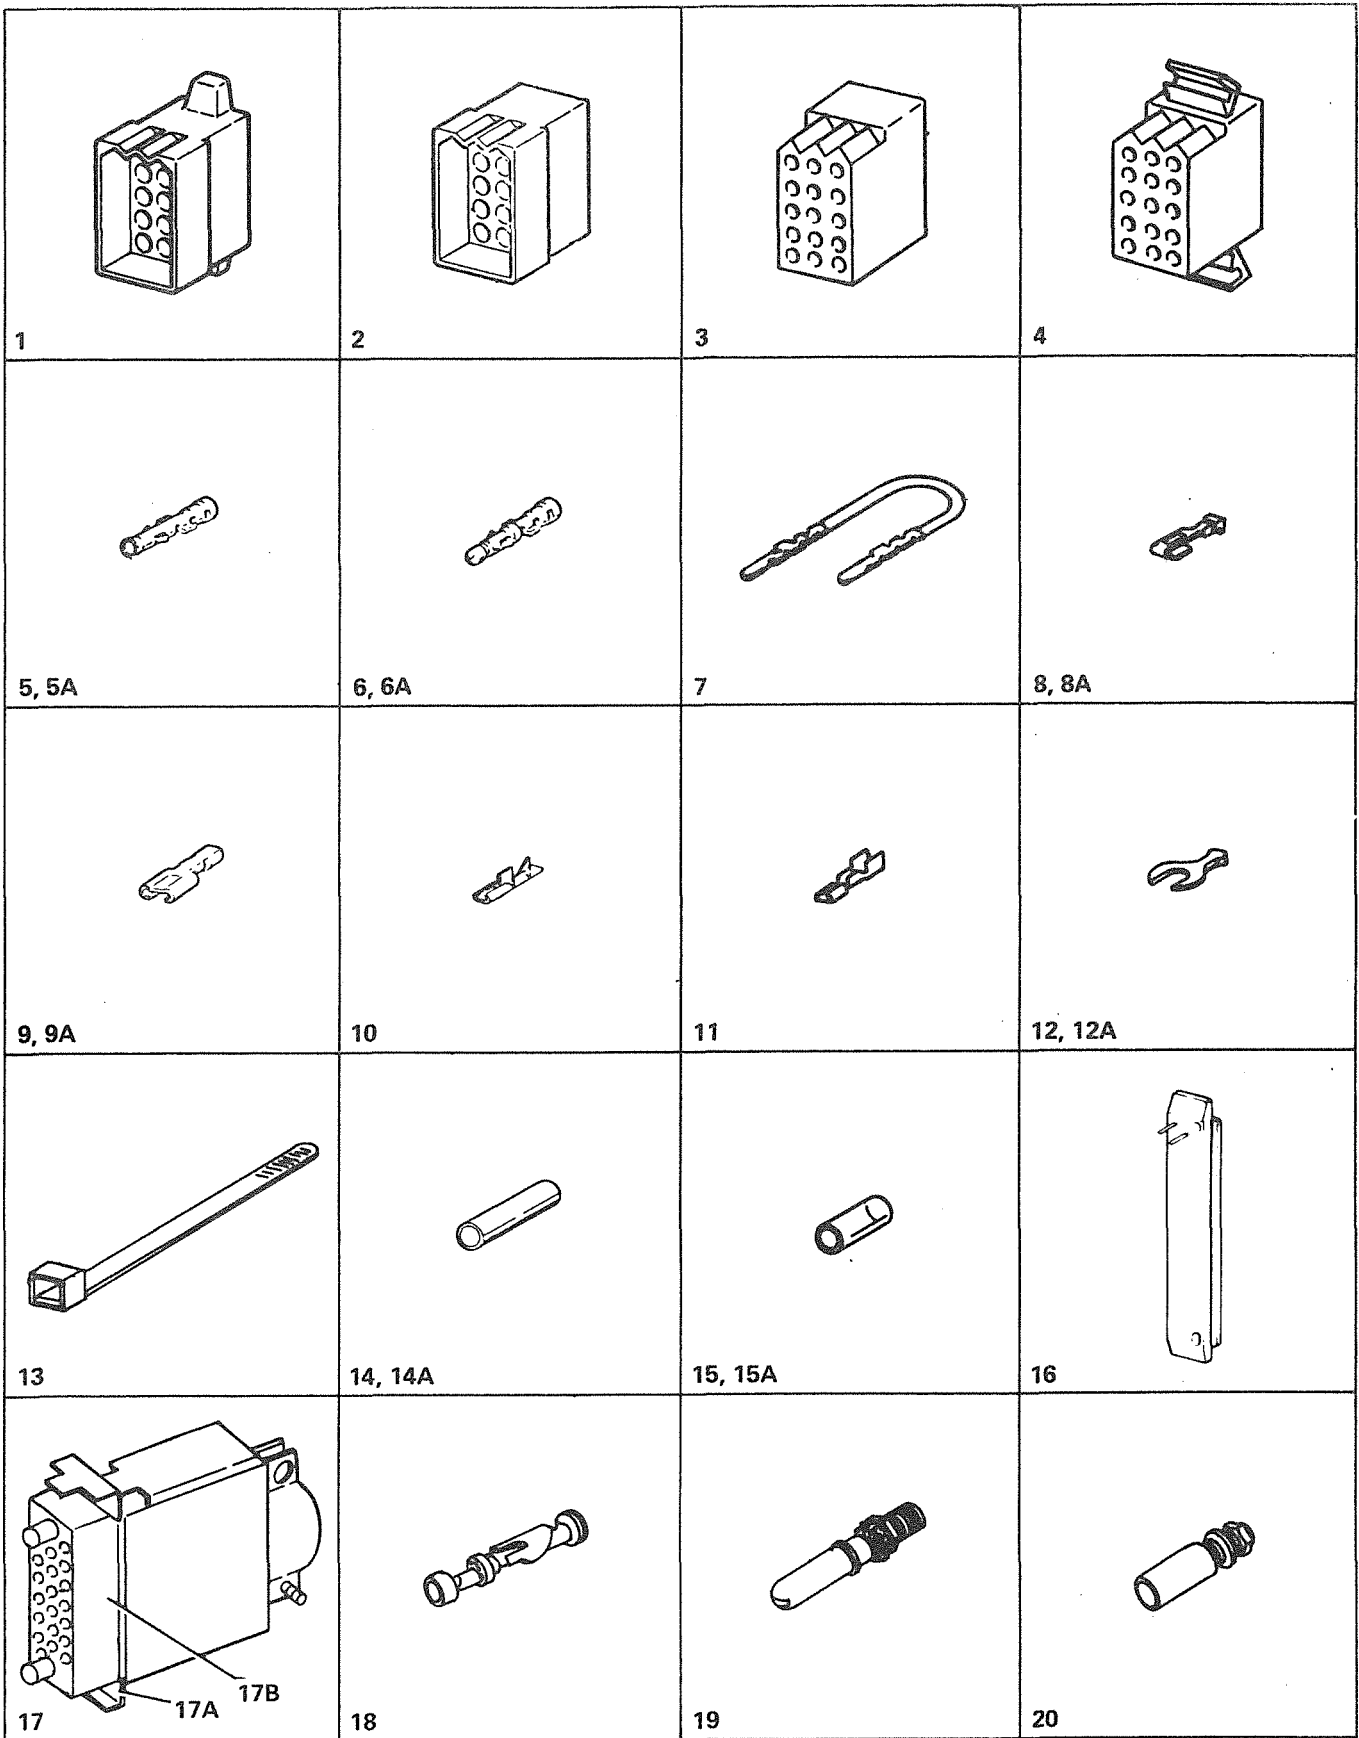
CABLE AND JUMPER ASSEMBLY COMPONENT PARTS. SEE LIST 43.
